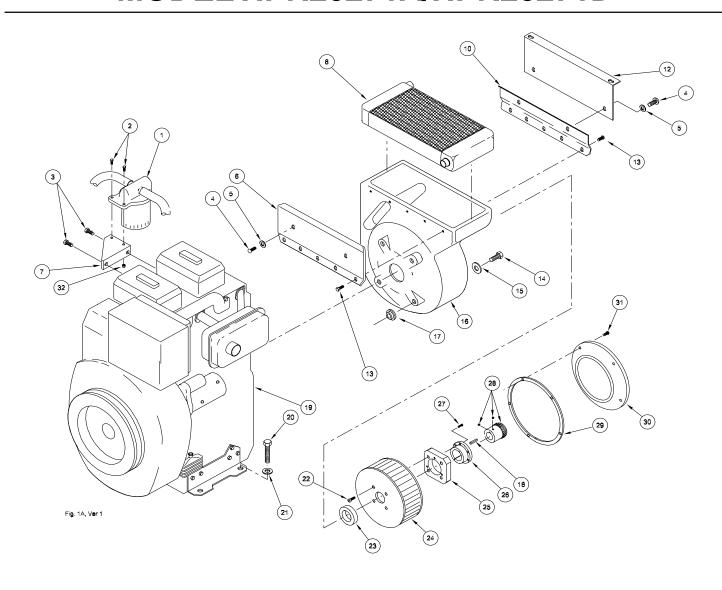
ENGINE & BLOWER PARTS MODEL HPR20271
